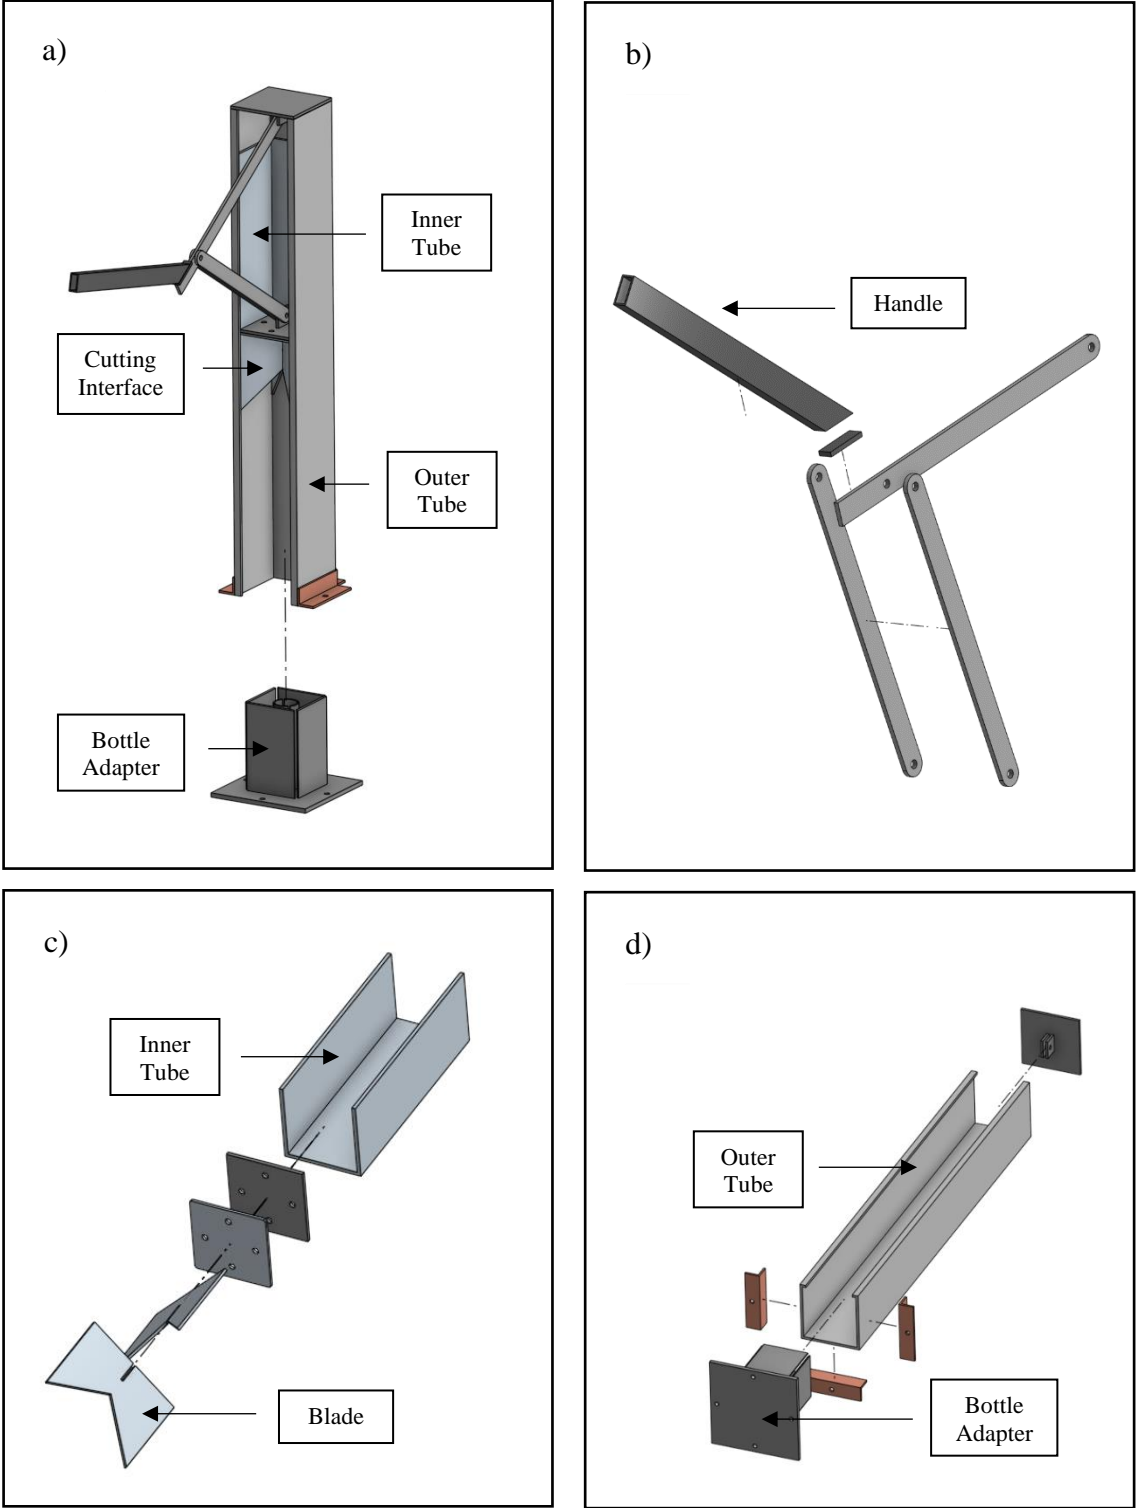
3D- representation of the cutting module: a) Complete Assembly, b) Explosion view of the handle and joints, c) Explosion view of the inner tube with blades attached, d) Explosion view of the outer tube with the bottle adapter attached
